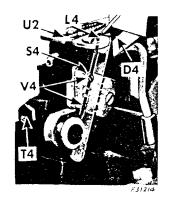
(Machine 246K61) Removal and Replacement of Stationary Knife
